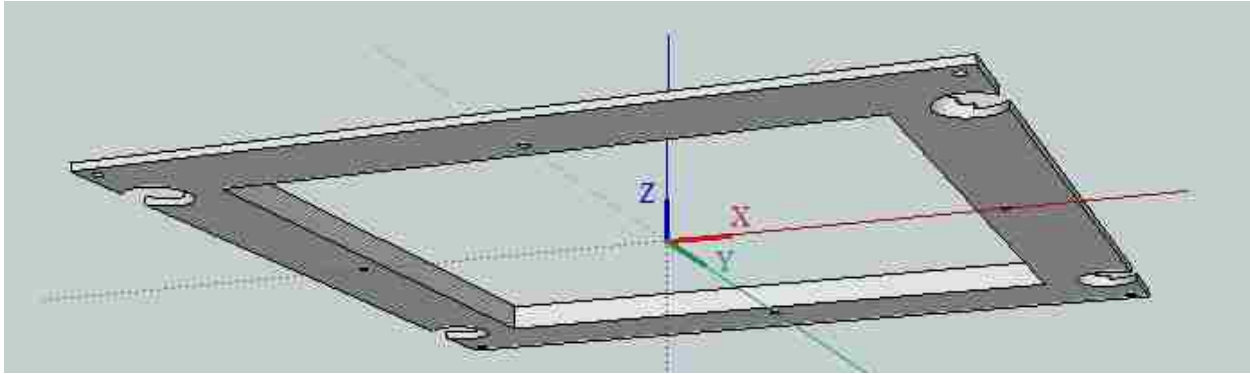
Bottom orthogonal view of the 20x20 cm² middle trimmer lead plate.
